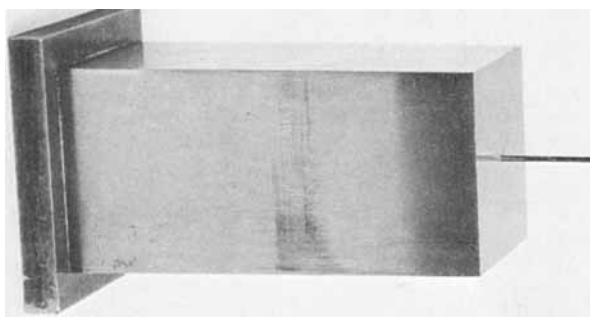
Special punch used to make compacts with small hole in center. Pin is spring loaded and retractable so that any reasonable compact thickness can be used.
